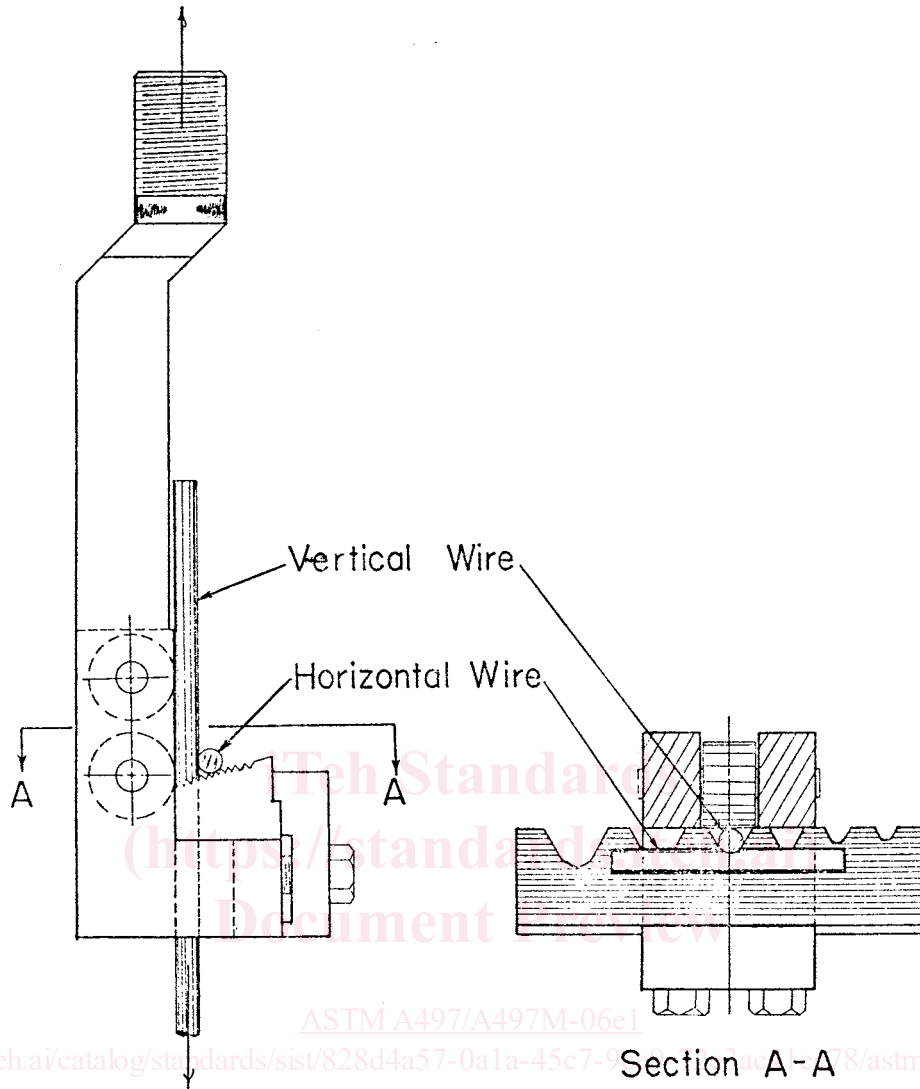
Welded Wire Reinforcement Weld Tester
